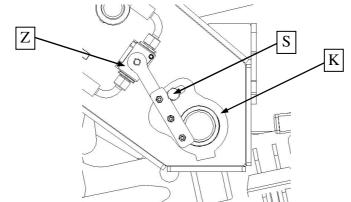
Adjusting lifting time of front rotor against first rotor S – Adjustment screw, Z – Valve, K – Cam
